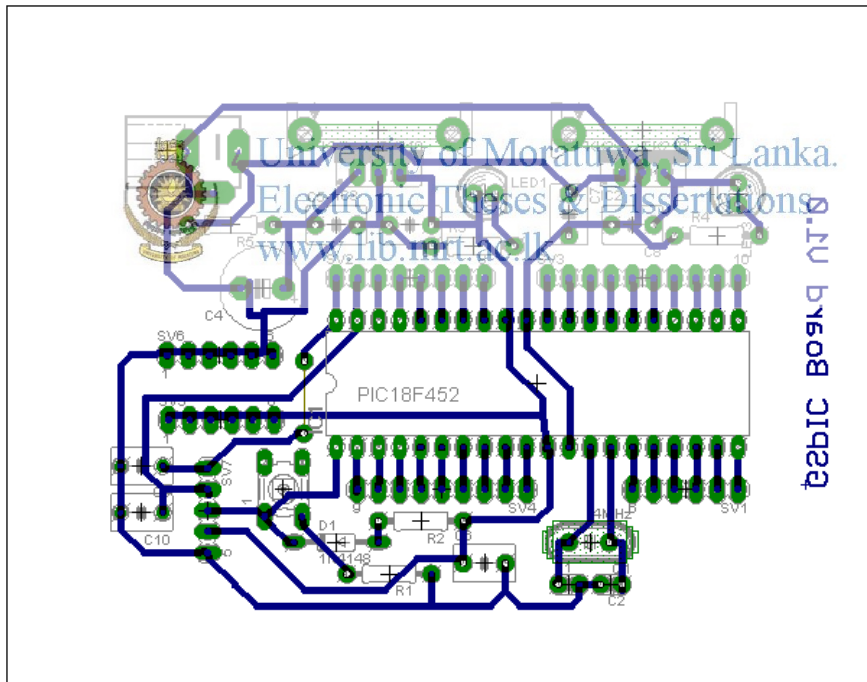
d PCB pattern of Humidity Controller main circuit
